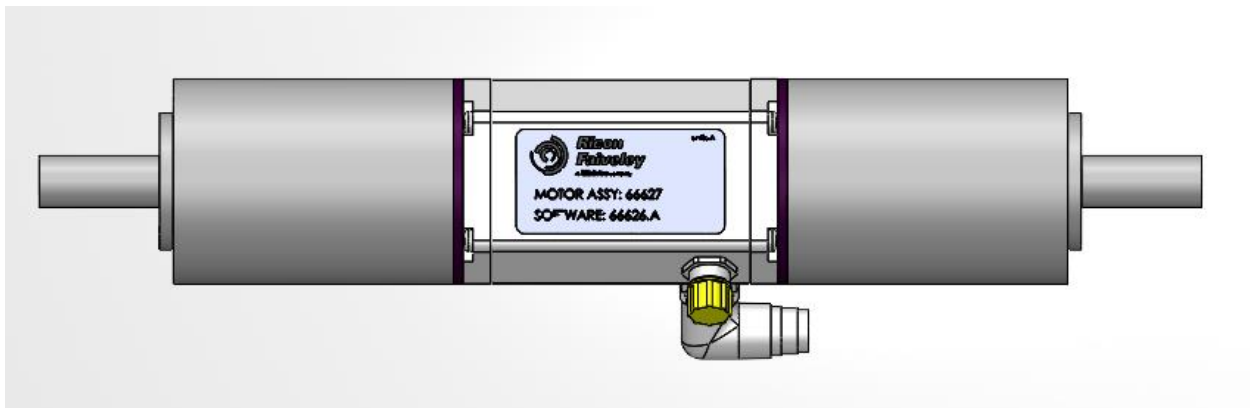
SSR Motor Assembly P/N 66627 w/o Holding Current
